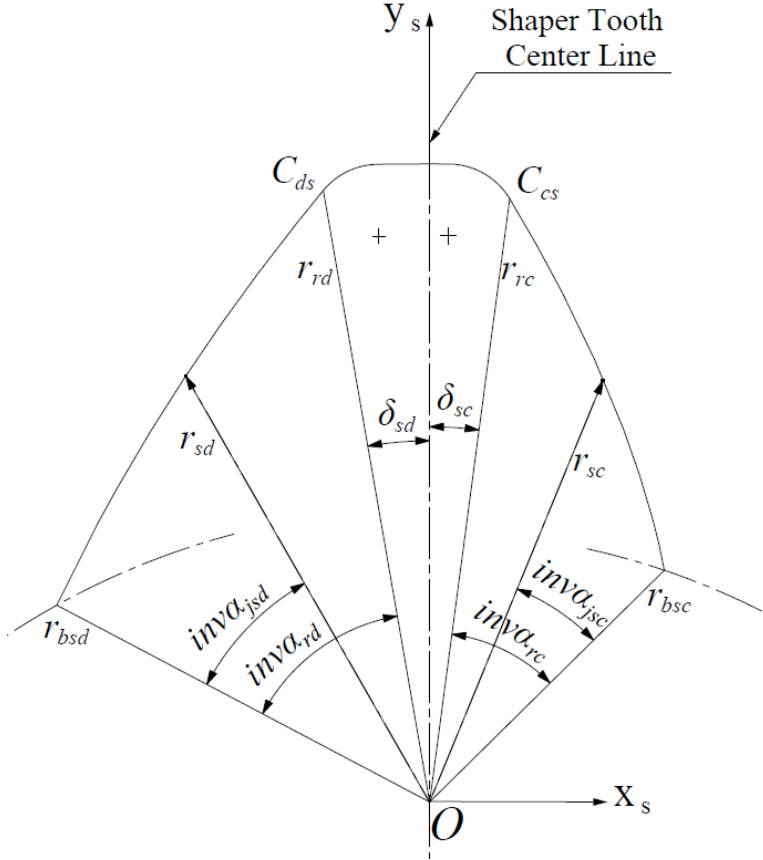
The position vectors of asymmetric shaper cutter drive and coast sides involute flank surfaces
